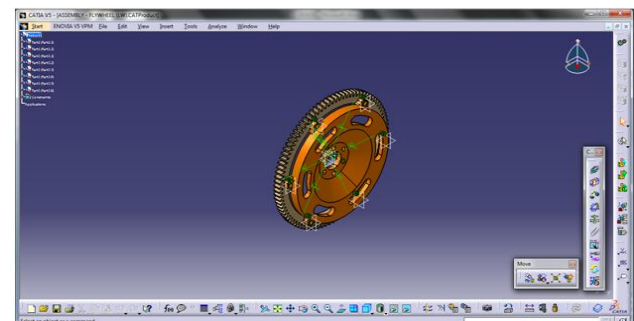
Model design of Automobile flywheel in CATIA-V5
